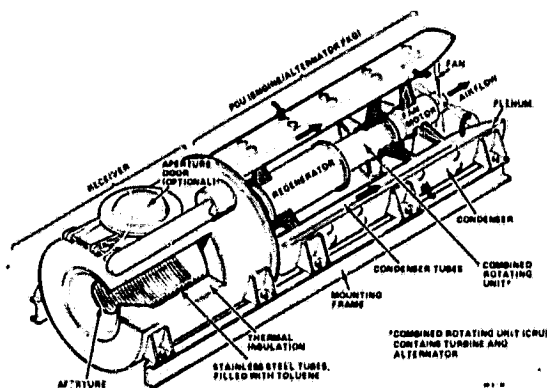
ORC POWER CONVERSION ASSEMBLY
